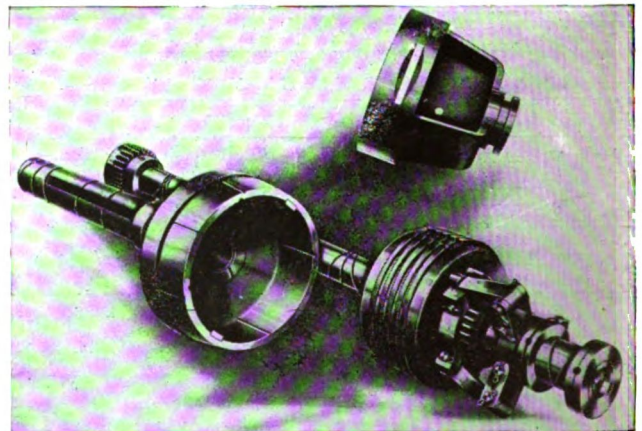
MULTIPLE DISC CLUTCH AND BRAKE DRUM
